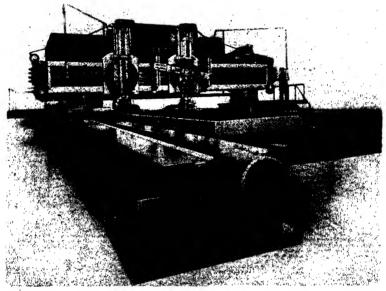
Large Betts planer for armor plate. Here the housing, crossrail, and toolhead travel over the work.
